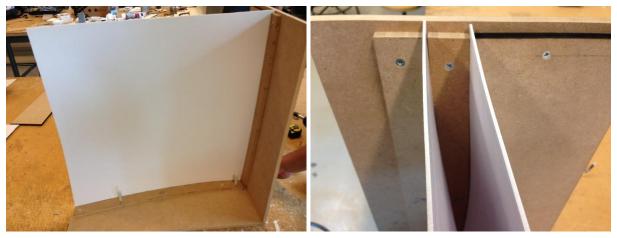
The PS sheet will be clamped one by one & Figure 122b: The milled edges will be screwed on a wooden plate
